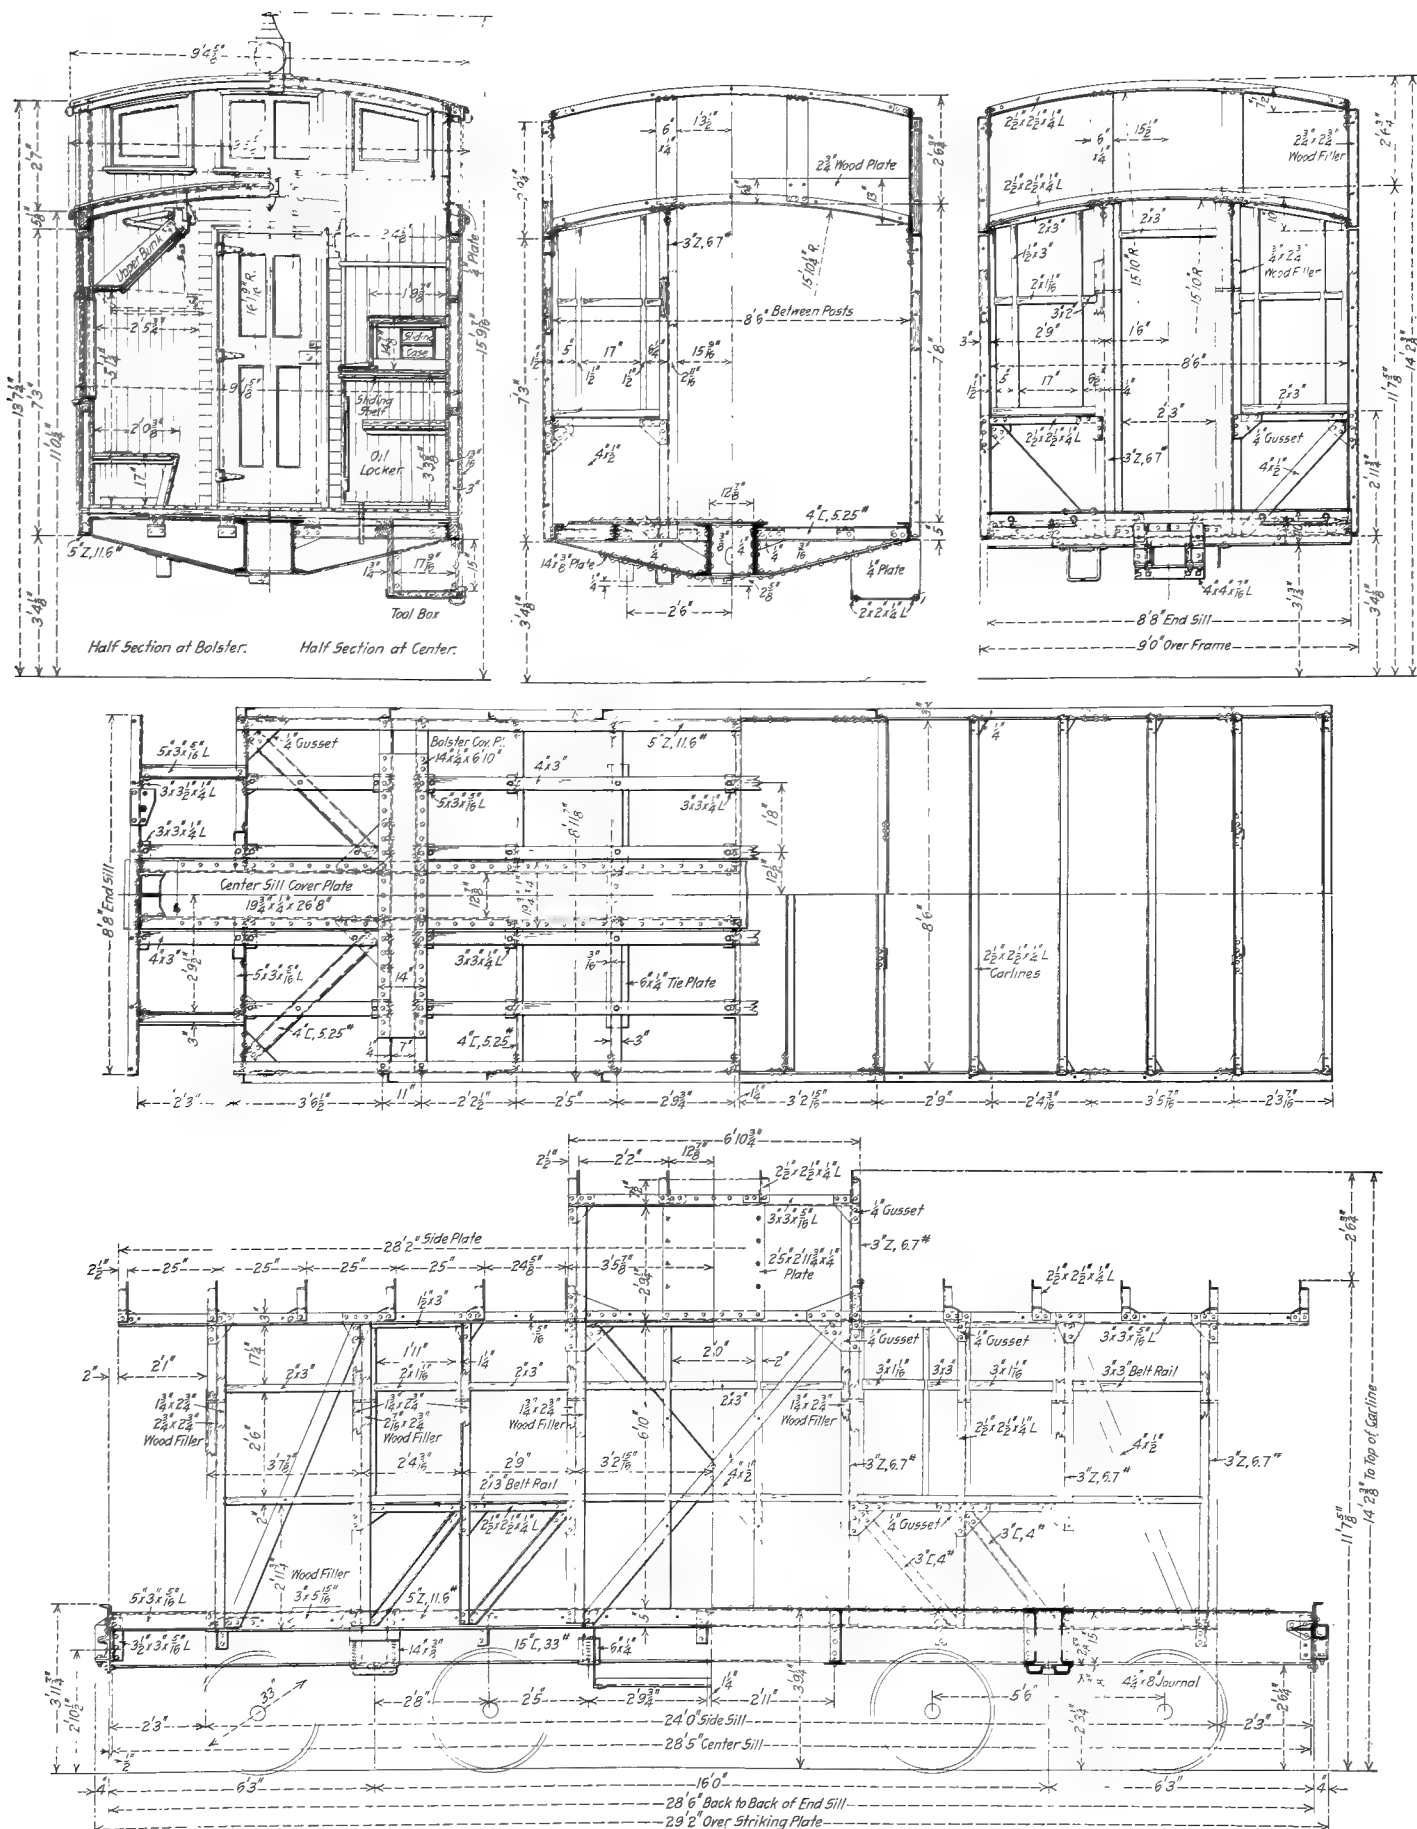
Buffalo, Rochester & Pittsburgh Steel Frame 8-Wheel Caboose.
